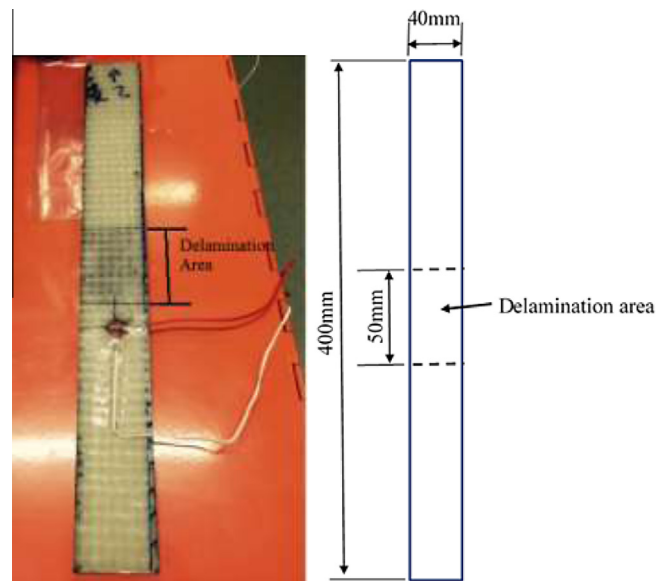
Glass/Epoxy specimen (400 mm × 40 mm × 7.5 mm).
